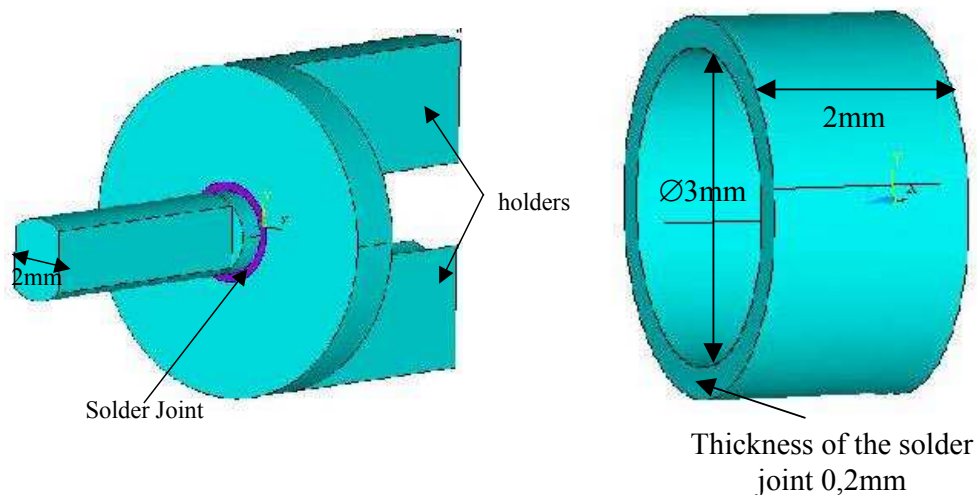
The modified Ring-and-Plug test specimen. The "plug" has to be milled to facilitate its montage on the Rheometer. Holders are added to the "ring". On the left, the solder joint dimensions are shown. (N.B: It will be not easy to reduce these dimensions)
